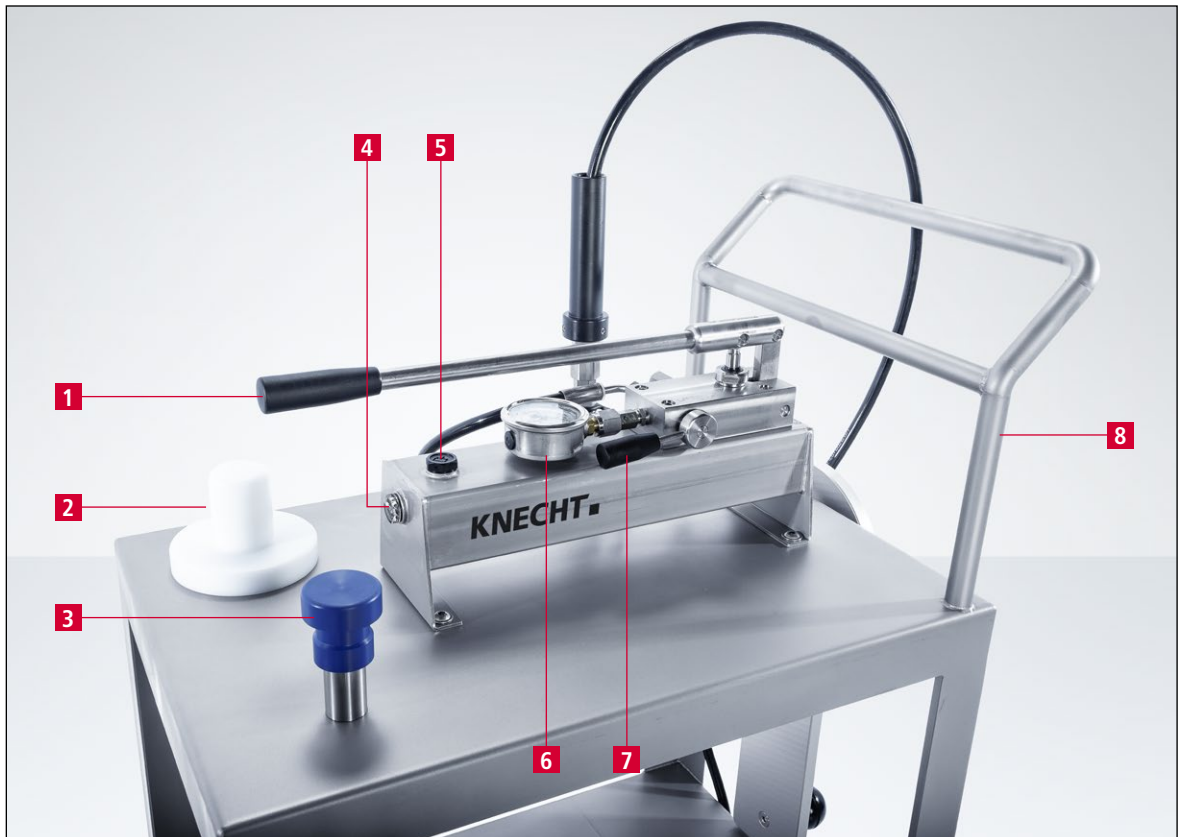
General view of the HSM 100 Hydromechanical Clamping Nut
